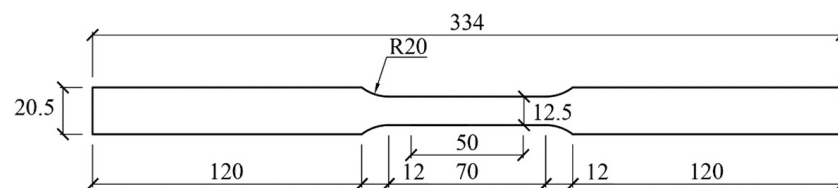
Tensile coupon size of 7A04-T6 aluminum alloy.
